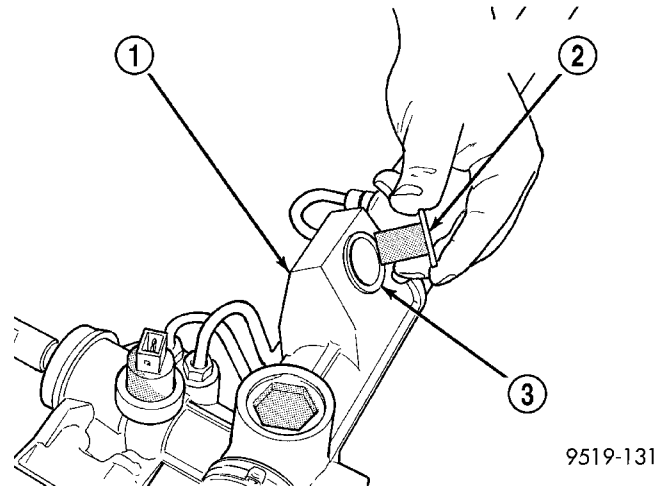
Mounting Bolt Isolator Sleeve Installation
